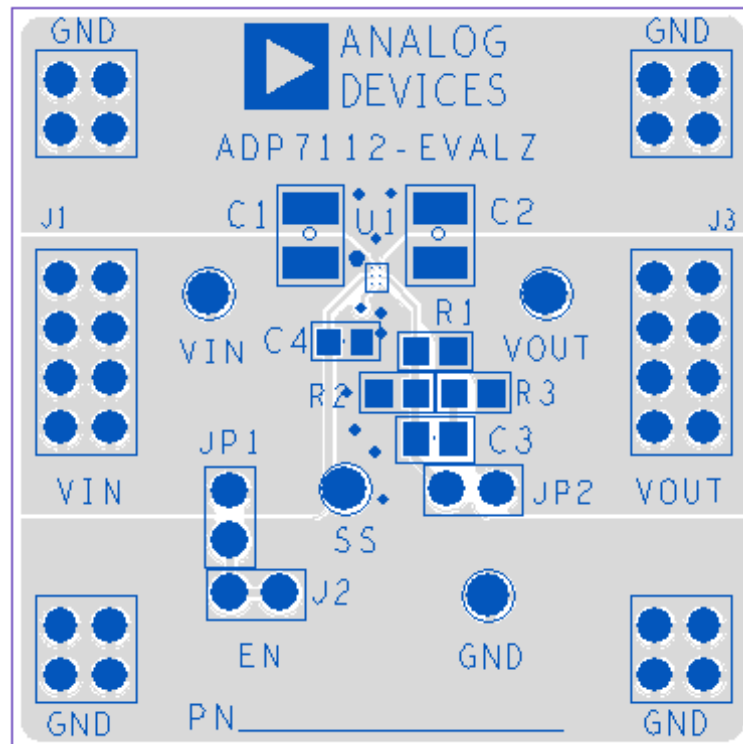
ADP7112CB-EVALZ Printed Circuit Board (PCB) Layout
